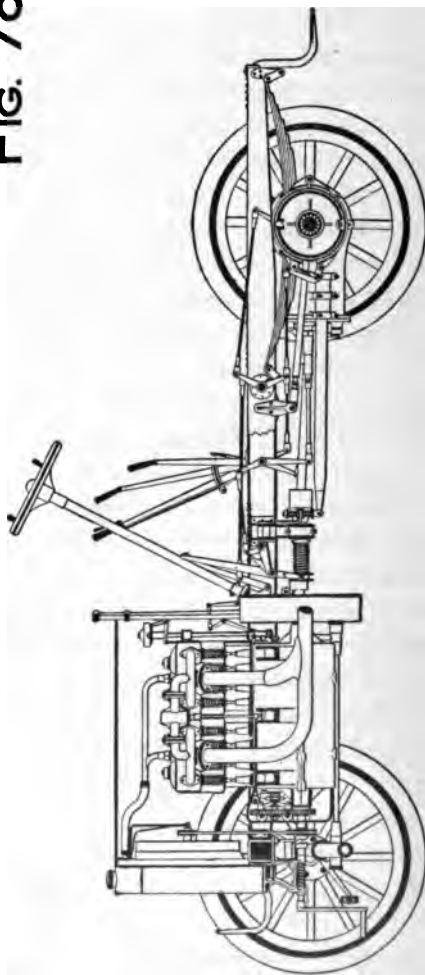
illustrates a vertical section of a running gear equipped with a vertical four-cylinder motor, and longitudinal propeller-shaft drive, by bevel gearing to the live rear axle.
